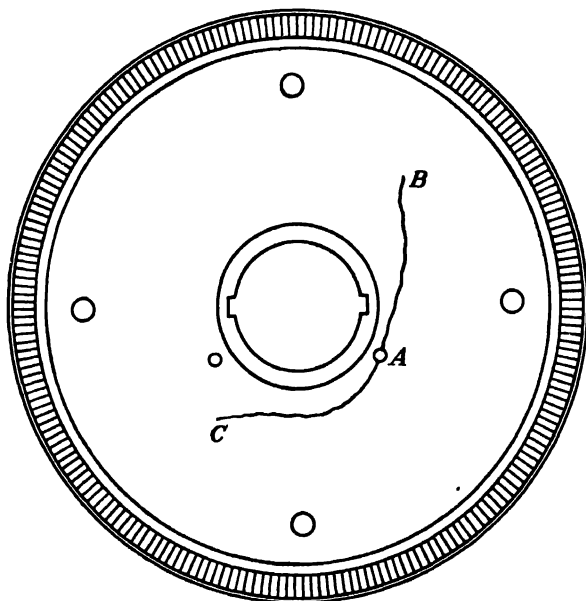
Spreading crack in steam turbine disk. Crack started at hole *A* and spread to *B* and to *C*.
